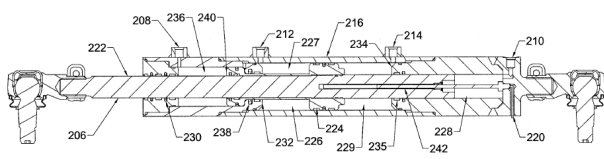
Centering Cylinder Cross-sectional view.²⁷⁾
